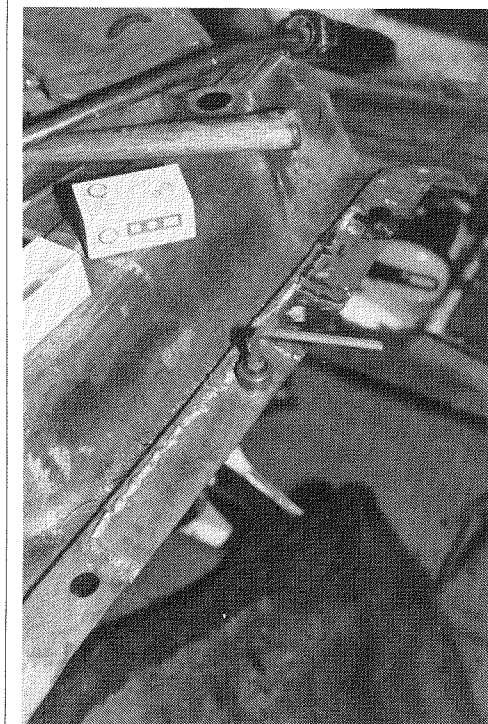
Cut out the rot, weld in a strip and cut new holes. A 'Q-MAX' sheet metal punch as shown here is the ideal tool for the job.
